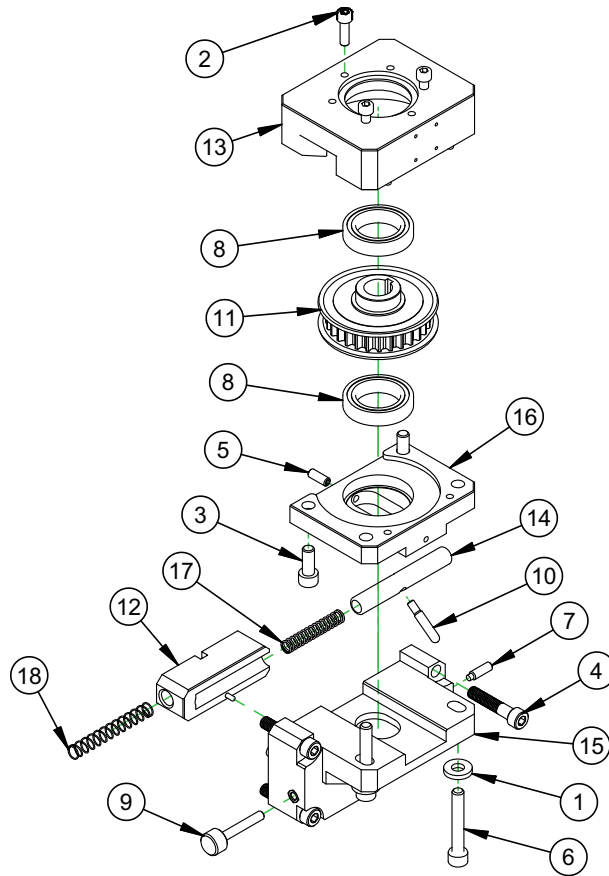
FF3600 ROTATIONAL DRIVE UNIT ASSEMBLY (P/N 80017)
